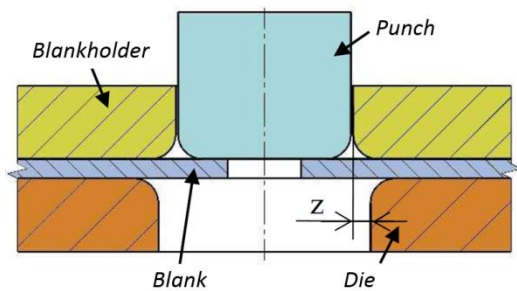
Arrangement of tools for circular hole flanging [Zejda 2020]
